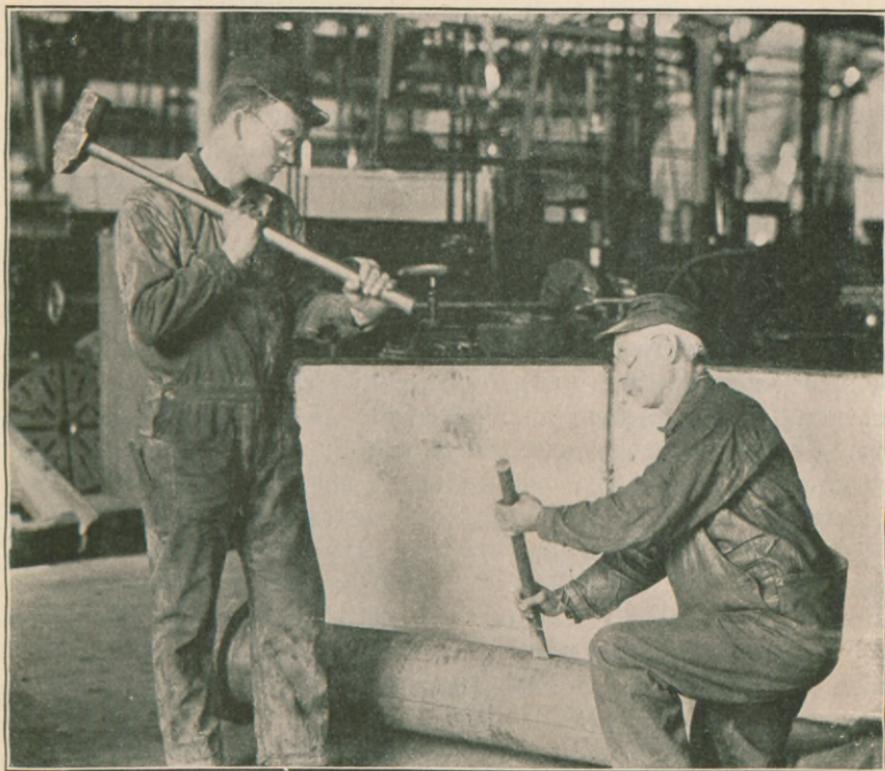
Workmen cutting rivets. Note shield, also use of goggles.
